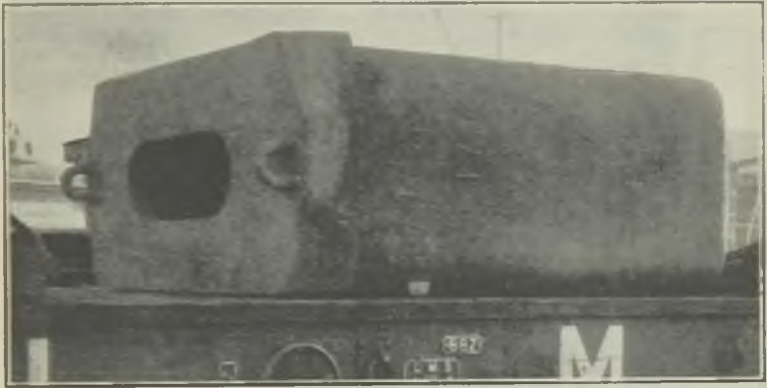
ANOTHER VIEW OF THE 21-TON INGOT MOULD SHOWN IN FIG. 11.
